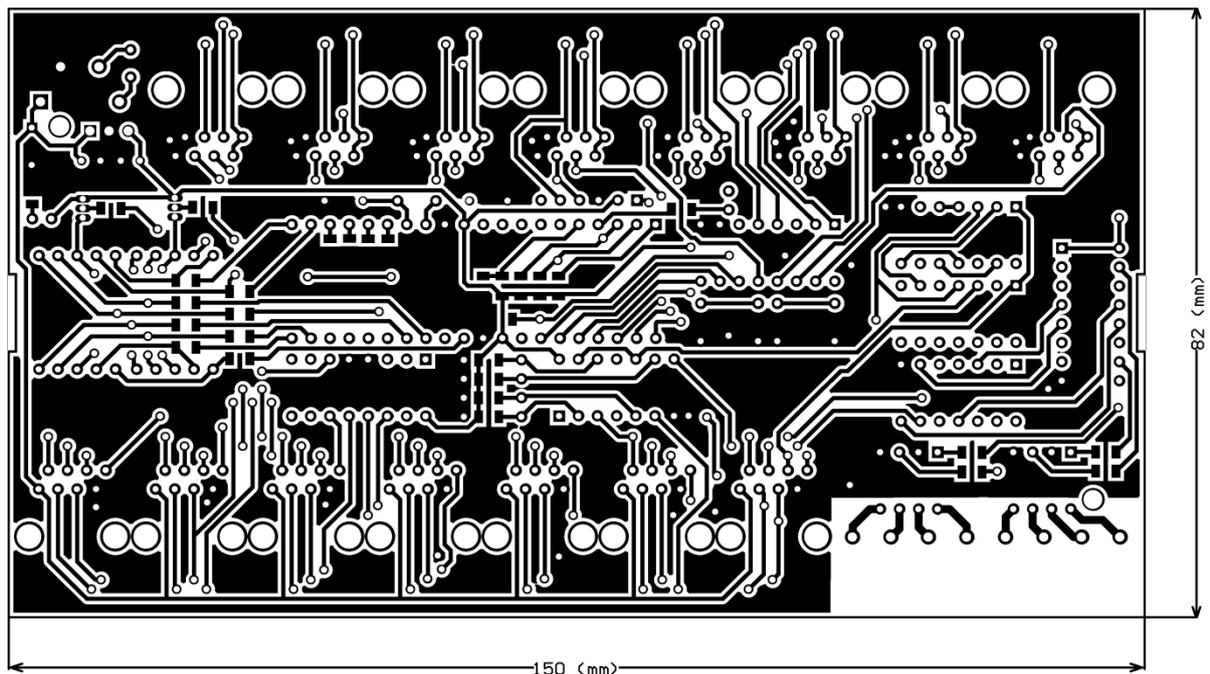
CONTROL BOARD'S BOTTOM LAYER.
